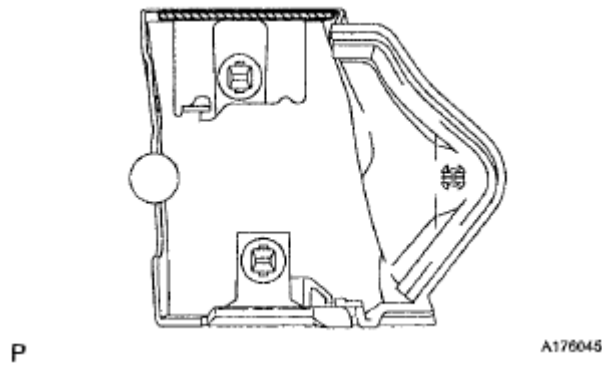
Identifying Front Fender Moulding Sub-Assembly RH
